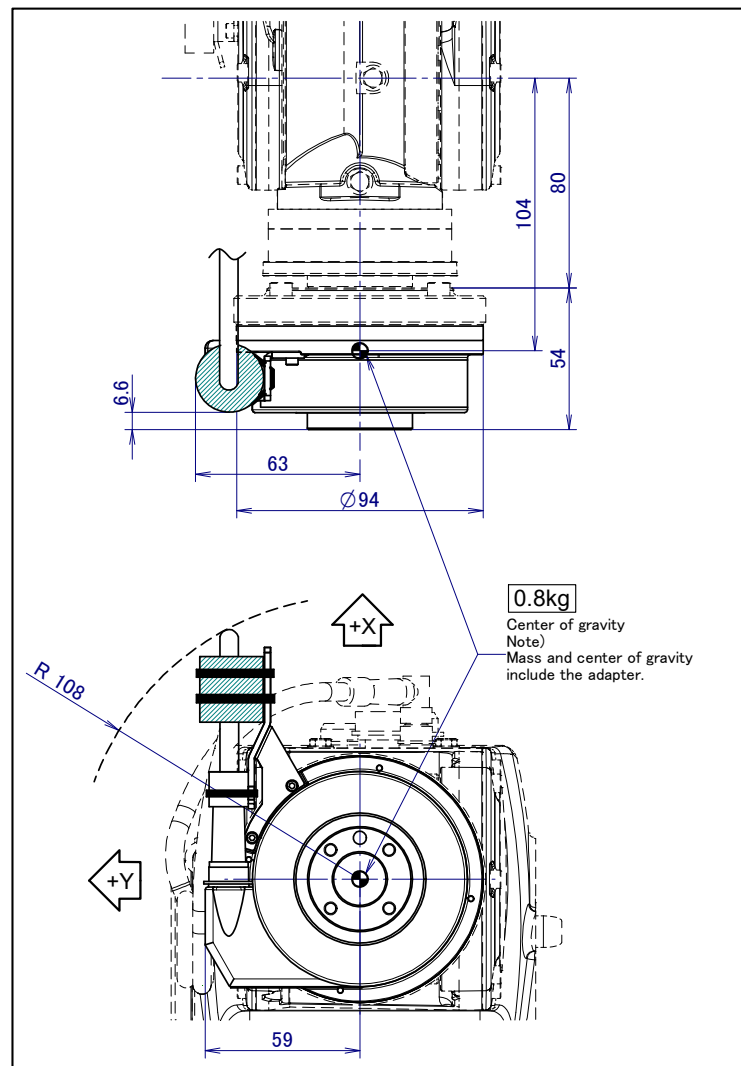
(a) External dimensions of the force sensor head
